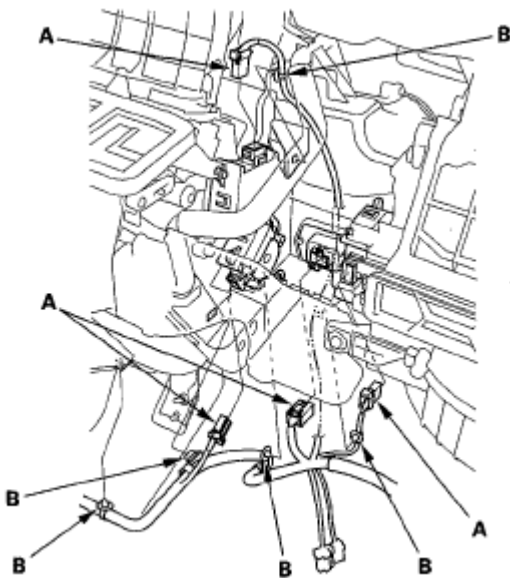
Identifying Front Mode Control Motor Connector And Wire Harness Clip
